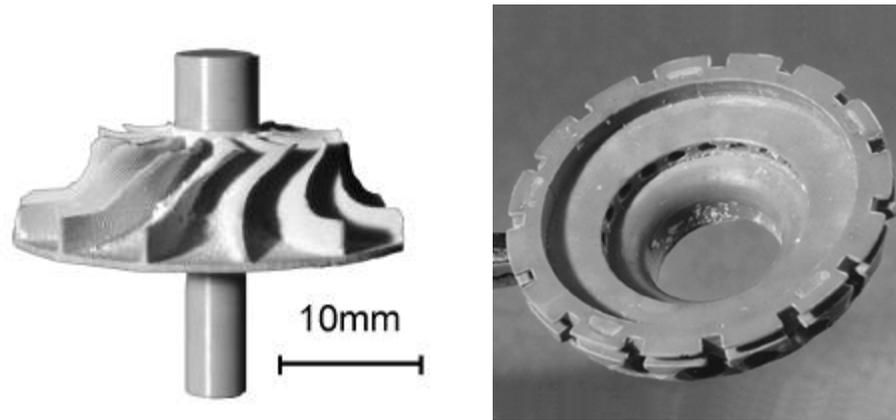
Silicon nitride turbine engine parts fabricated with Mold SDM: turbine-rotor (Left), inlet nozzle (Right).
